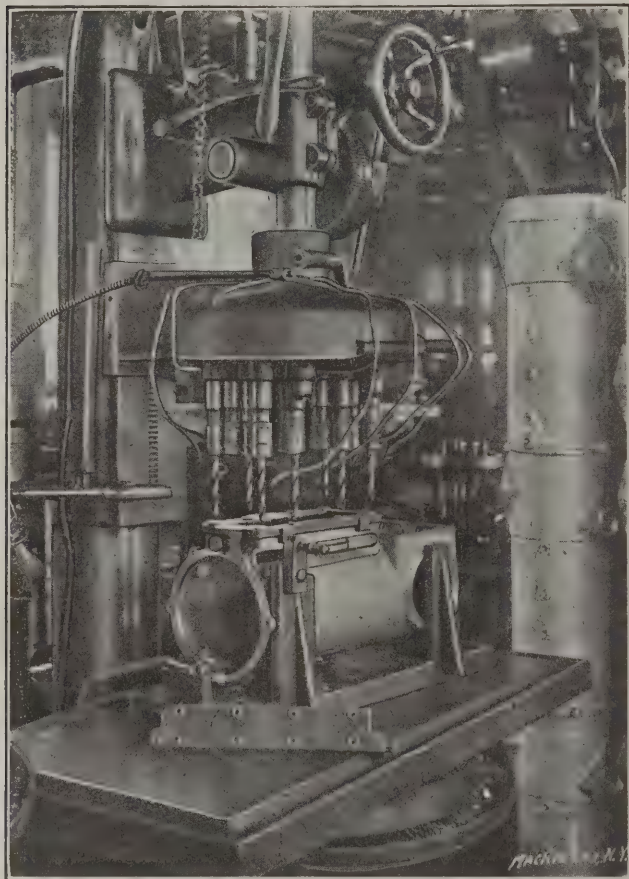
A Multiple Spindle Drilling Head arranged for Two Lay-outs.
